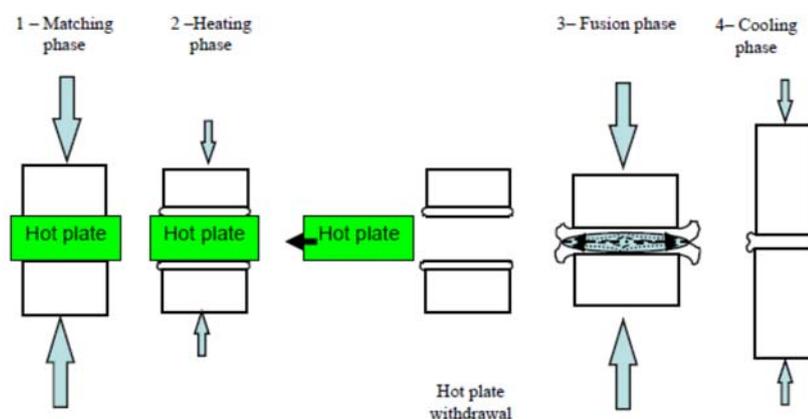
Hot plate welding process, Source: Hot Plate Welding (2006)
